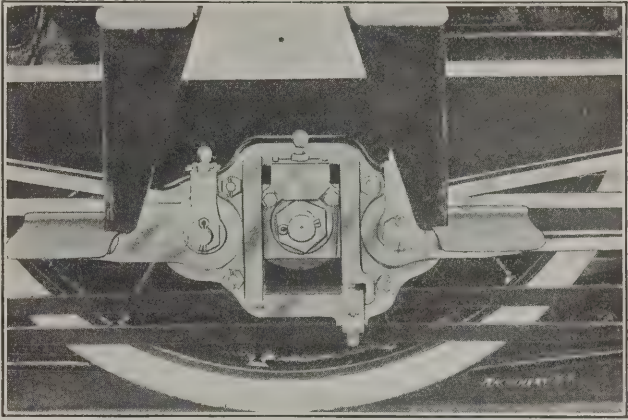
Bearing of Connecting-rod and Side Rods on Middle Crankpin.
